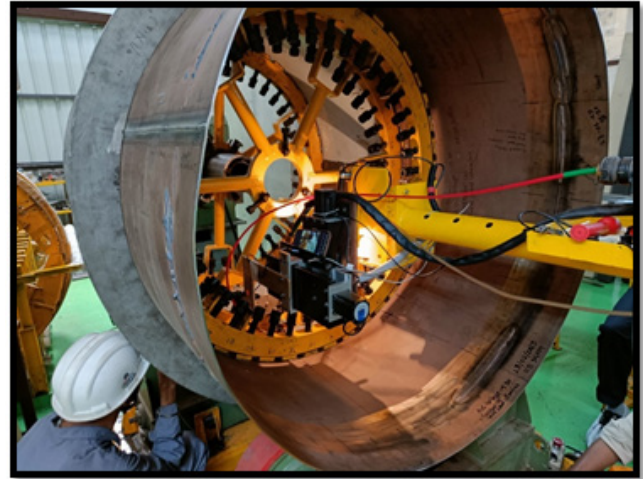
Welding trials to qualify L-seam and C-Seam welding in Integrated Vacuum Vessel.
